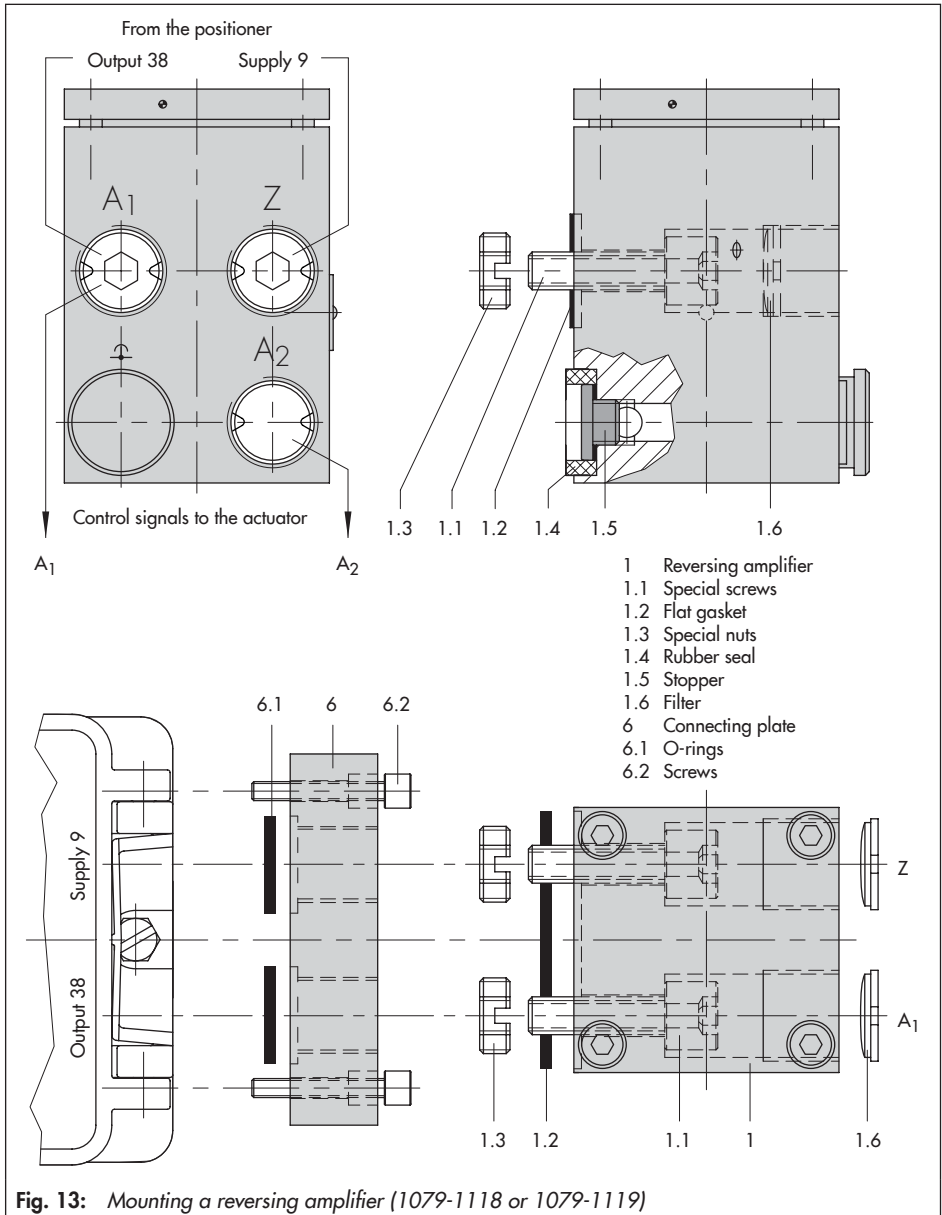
Mounting a reversing amplifier (1079-1118 or 1079-1119)
